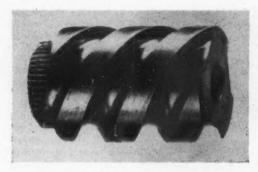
A clutch pressure spindle with a 3-start Acme thread produced by rolling
